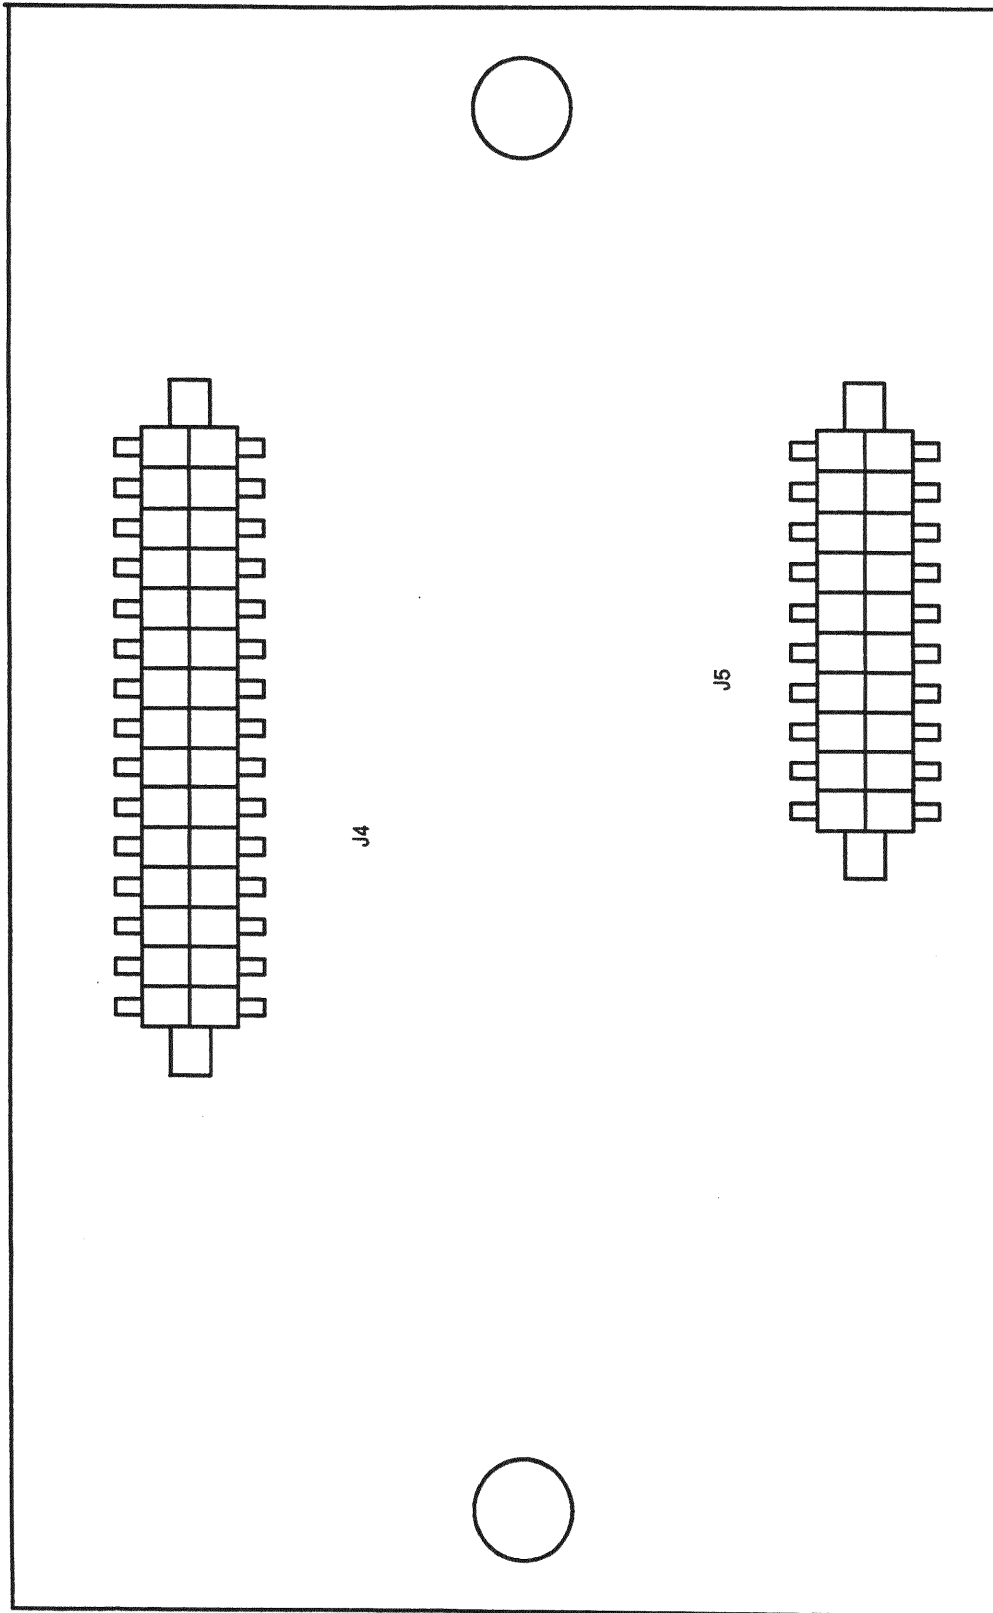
A11A1 Daughterboard PWB Assembly Component Location Diagram
